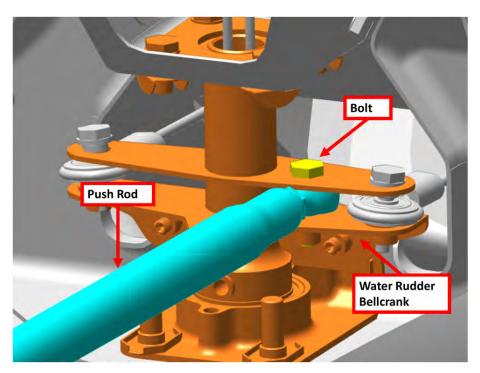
RUDDER PUSH TUBE ADJUSTMENT
